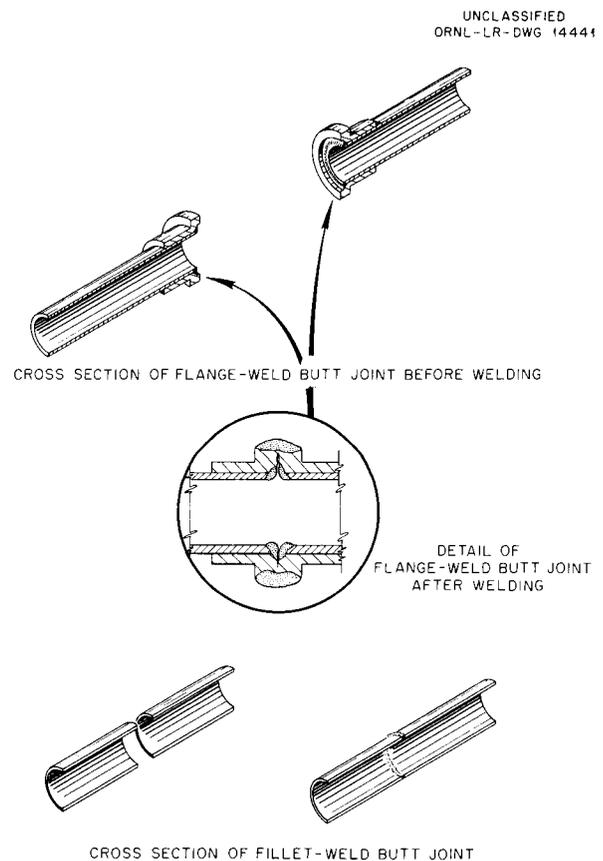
Welded Joints for Tubing of Fuel Loop.
